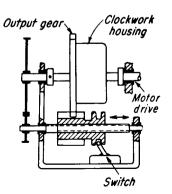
Automatic clockwork is kept would taut by an electric motor turned on and off by a screw thread and nut. The motor drive must be self-locking or it will permit the clock to unwind as soon as the switch is turned off.
